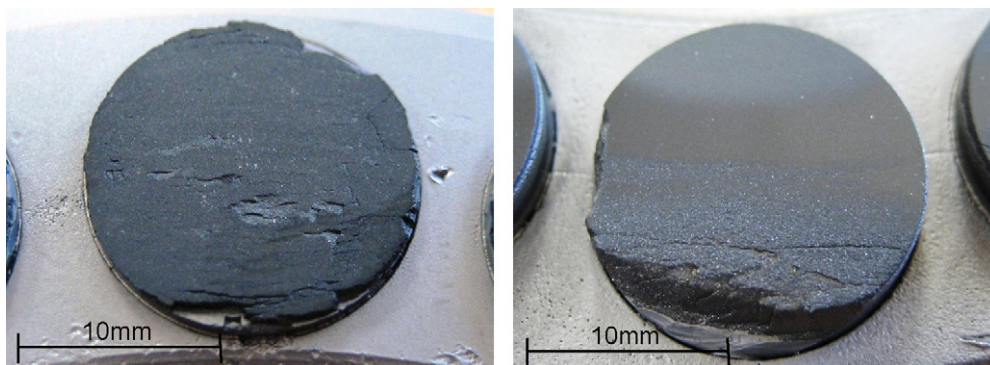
PCD inserts from bearings used in two different down-hole drilling motors.
